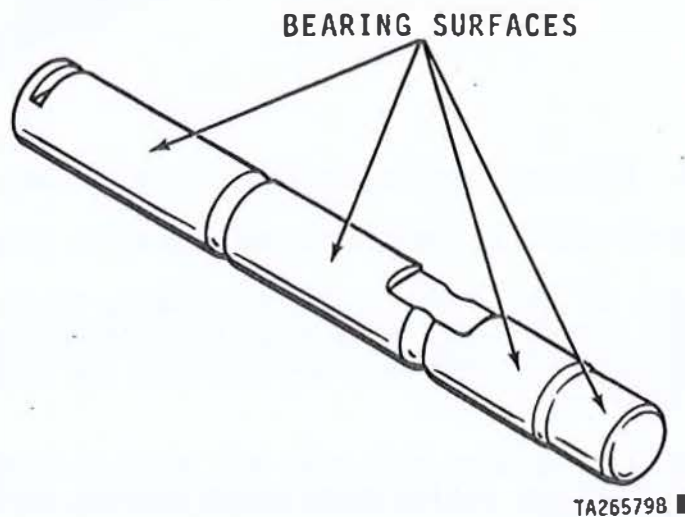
Oil pump impeller driven shaft bearing surfaces.
